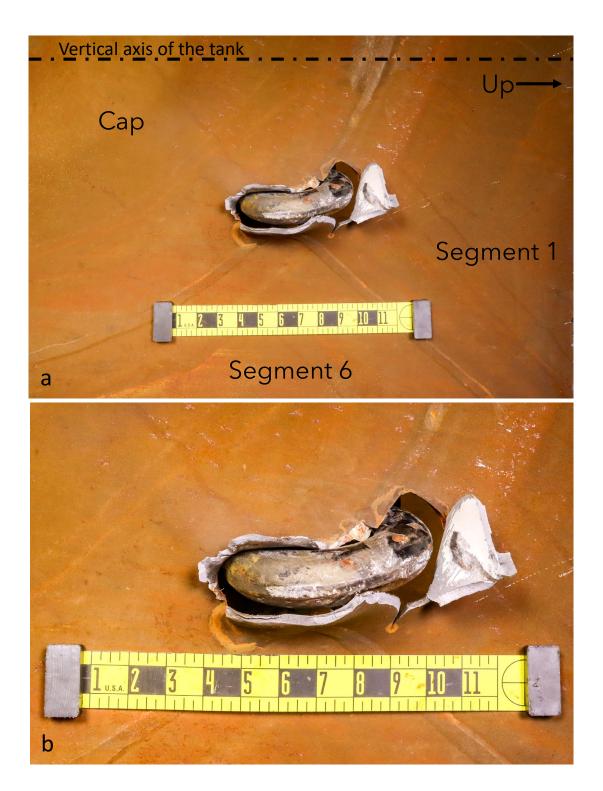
Views of the internal surface of front head shell piece A with the trailer hitch lunette ring in close proximity to the perforation. Deformed material petaled inward from the exterior. View a shows the location of segment 1, 6, and the cap.
